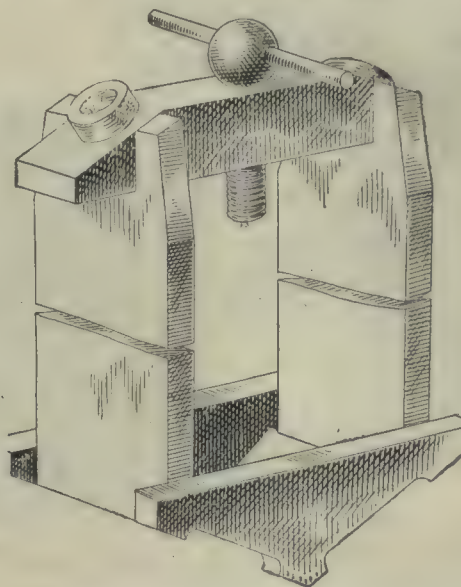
DRILL JIG FOR VALVE-STEM HOLES
